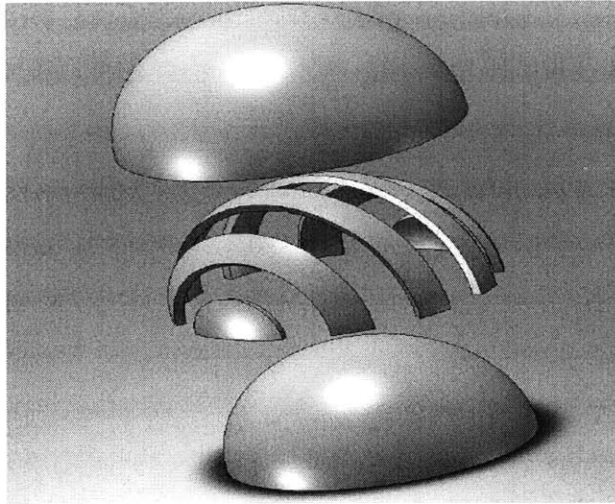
Exploded view of proposed 3D helmet liner
